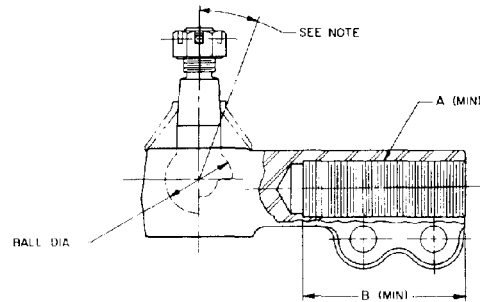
TYPICAL BALL STUD SOCKET ASSEMBLY WITH INTERNAL THREADED STEM
